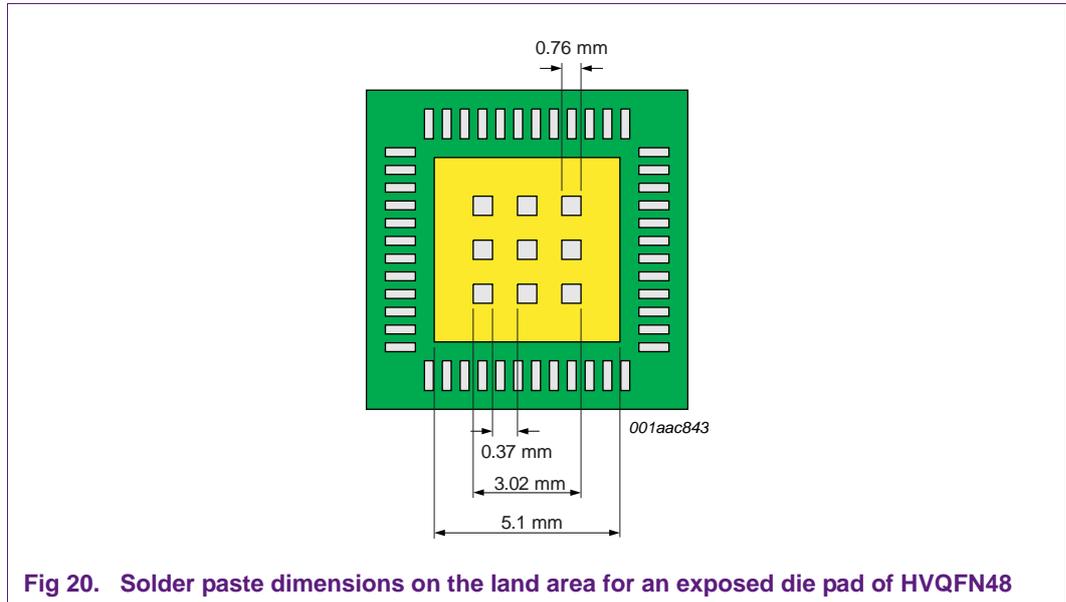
Solder paste dimensions on the land area for an exposed die pad of HVQFN48
